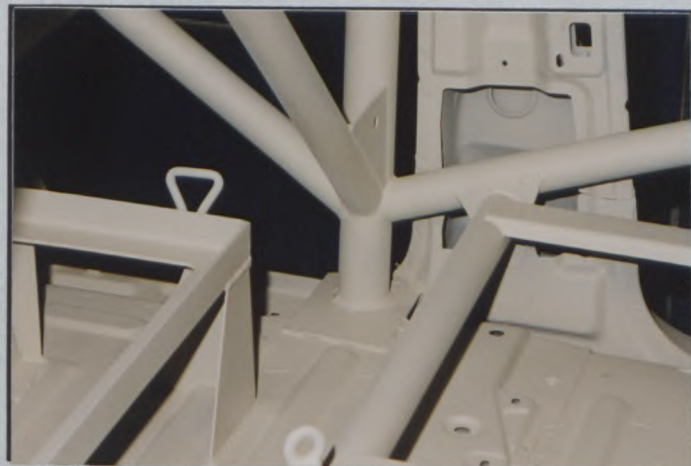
MAIN HOOP TO FLOOR-RIGHT
